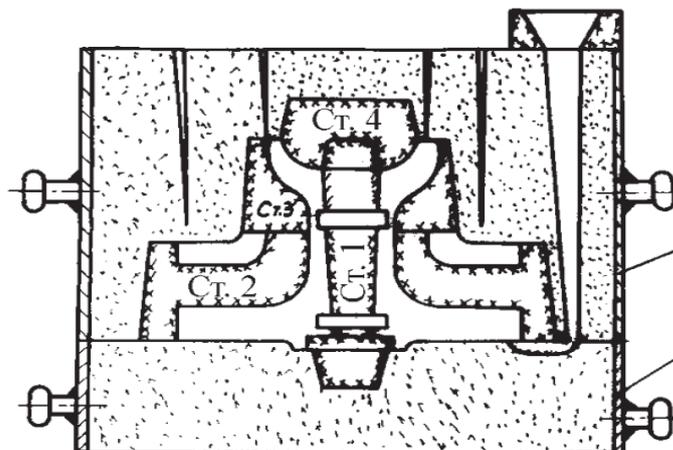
Forming scheme with a cooler (at the hub) of the pump impeller 6FSH – 7 a (weight about 90 kilos)
